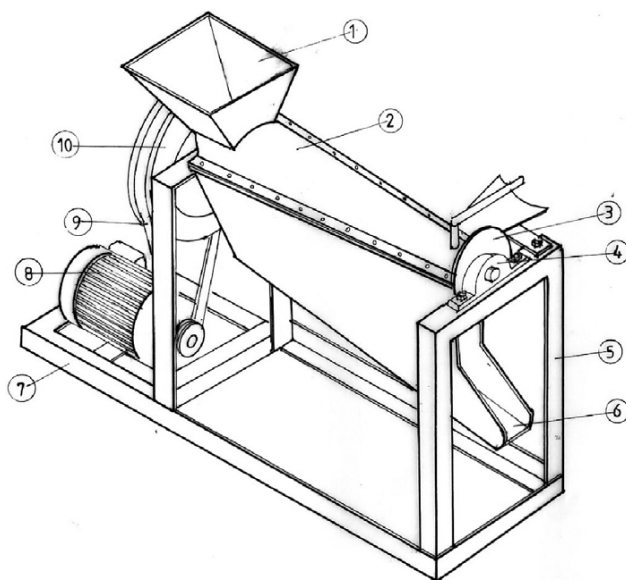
Isometric view of orange juice extractor: 1 – Hopper; 2 – Extraction Chamber; 3 – Dic plate; 4 – Bearing; 5 – Main frame; 6 – Juice collector; 7 – Motor stand; 8 – Electric motor; 9 – Transmission belt; 10 – Pulley
